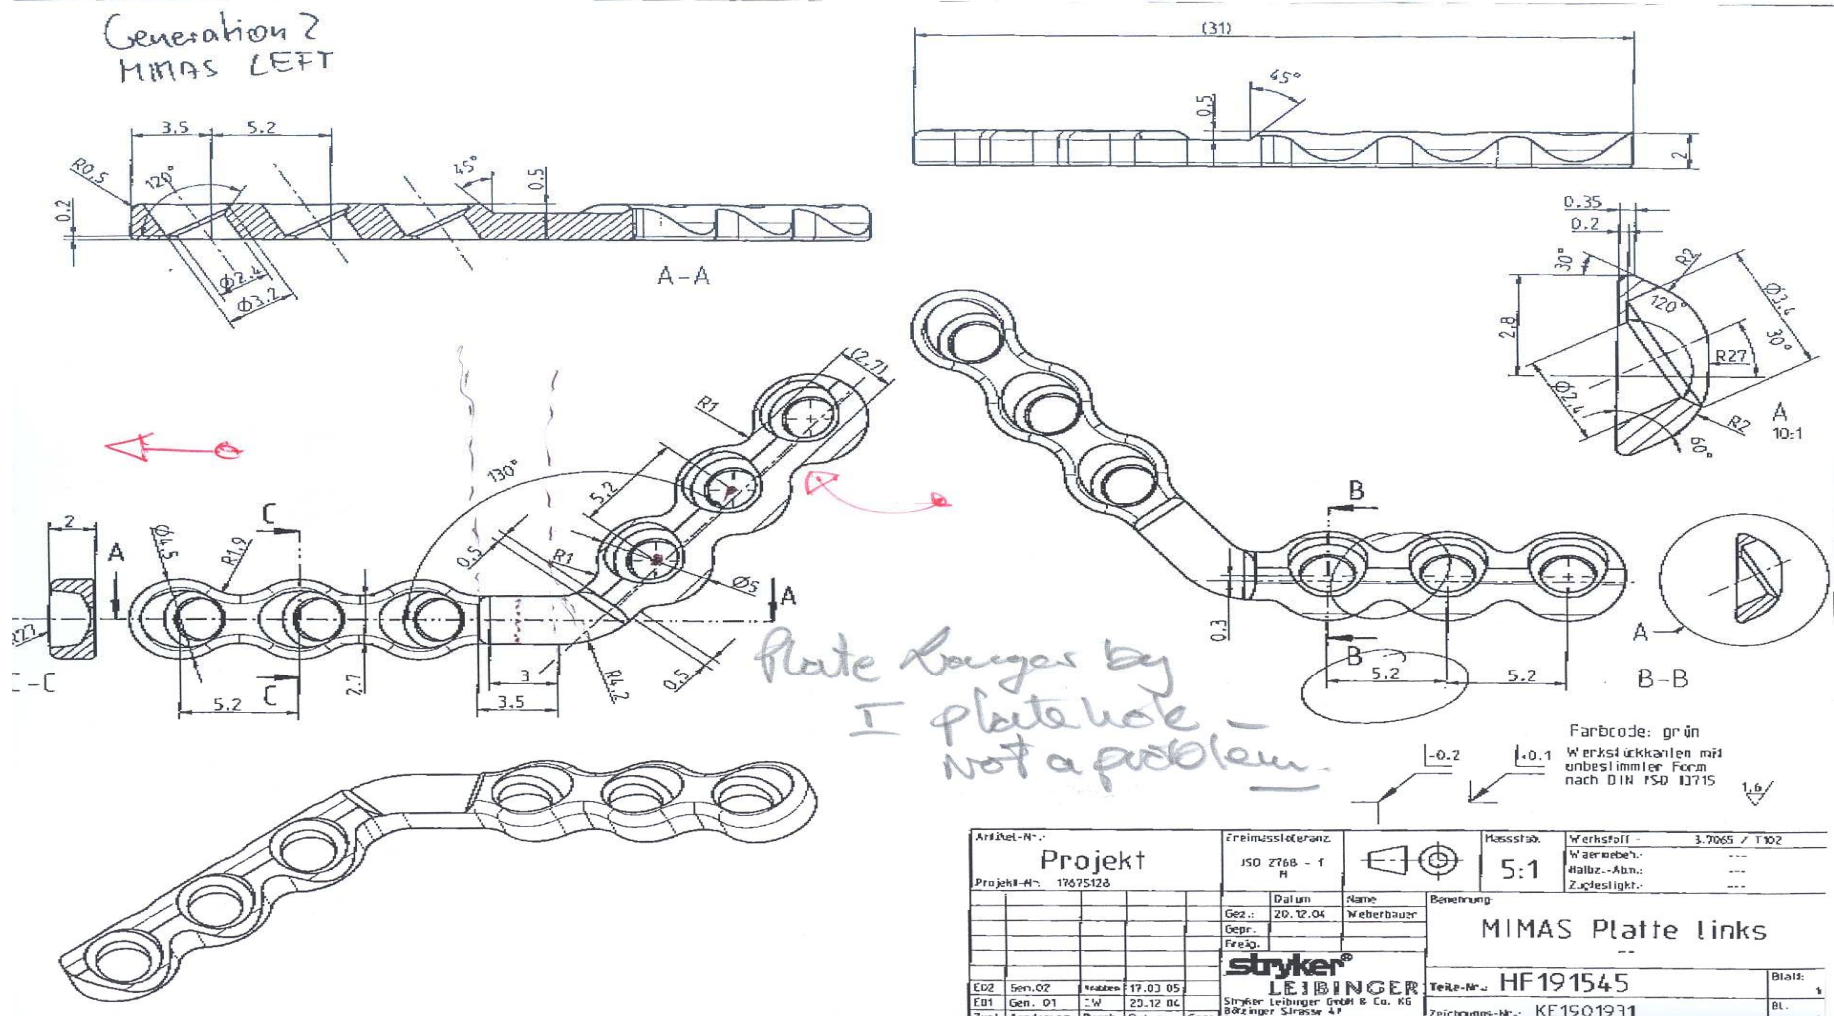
Design sketches for angle screw holes in L-shaped (ISI) mini-plates
